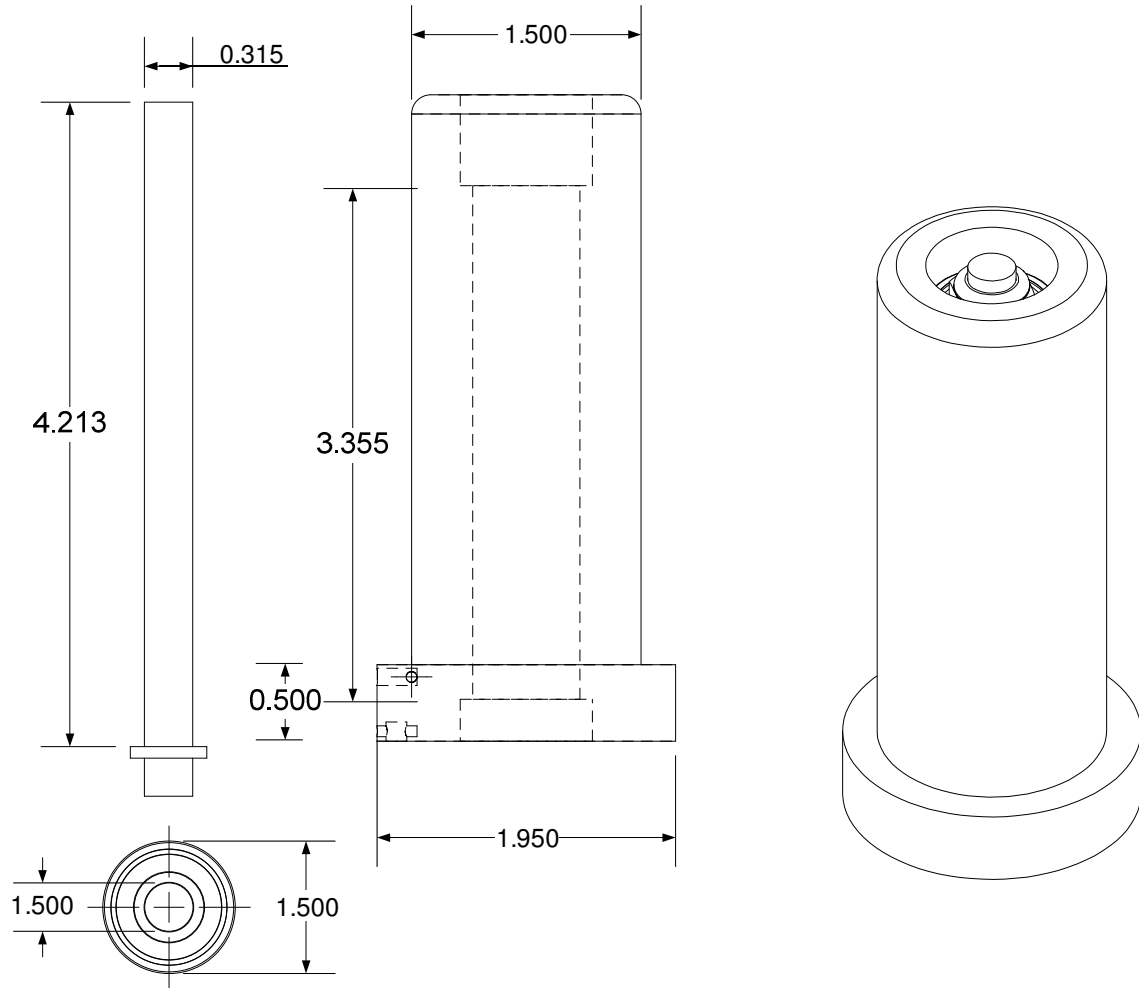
Handle stage parts and assembly including handle, handle shaft, and bearings.
